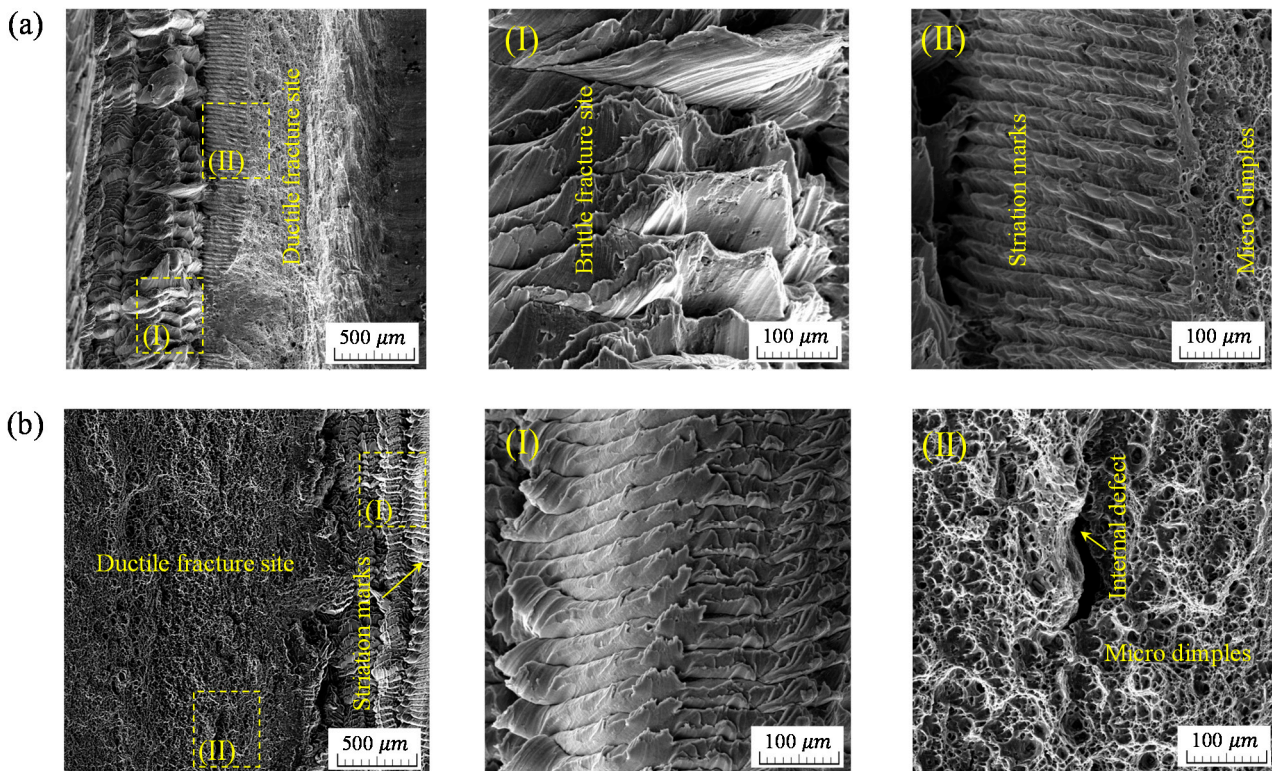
SEM images of fracture surface: (a) as-welded FSW joint sample; (b) STA heat-treated FSW joint sample.
